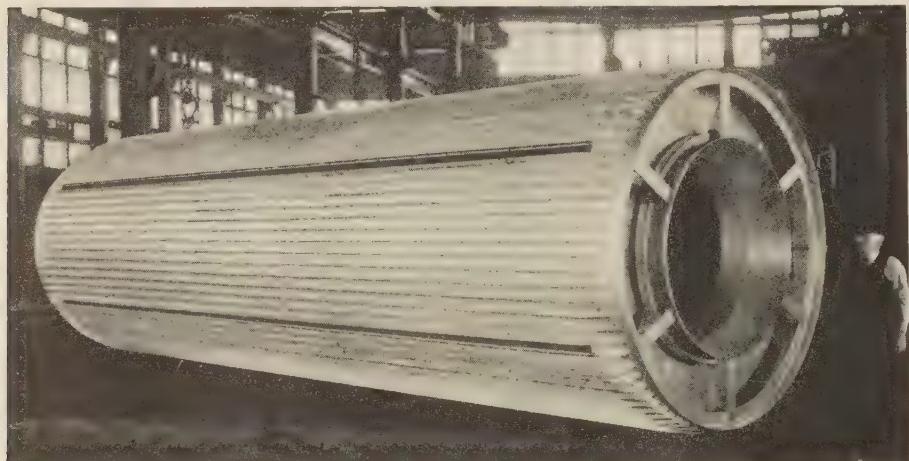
PART OF AN ELECTRIC PRECIPITATOR MADE FROM THIN SMOOTH SECTIONS TO ACCURATE DIMENSIONS
